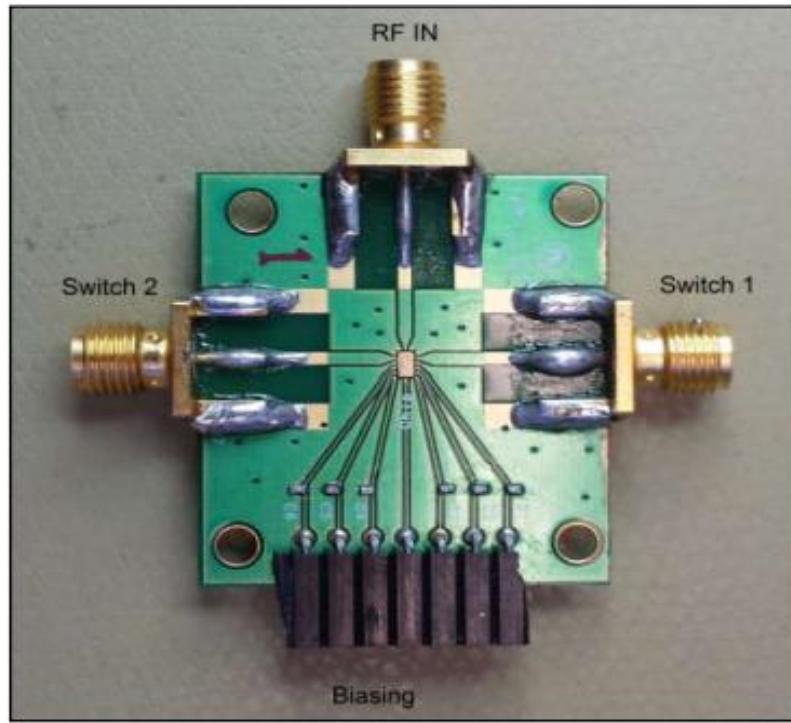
Test PCB with mounted chip and other components (sample 1)
